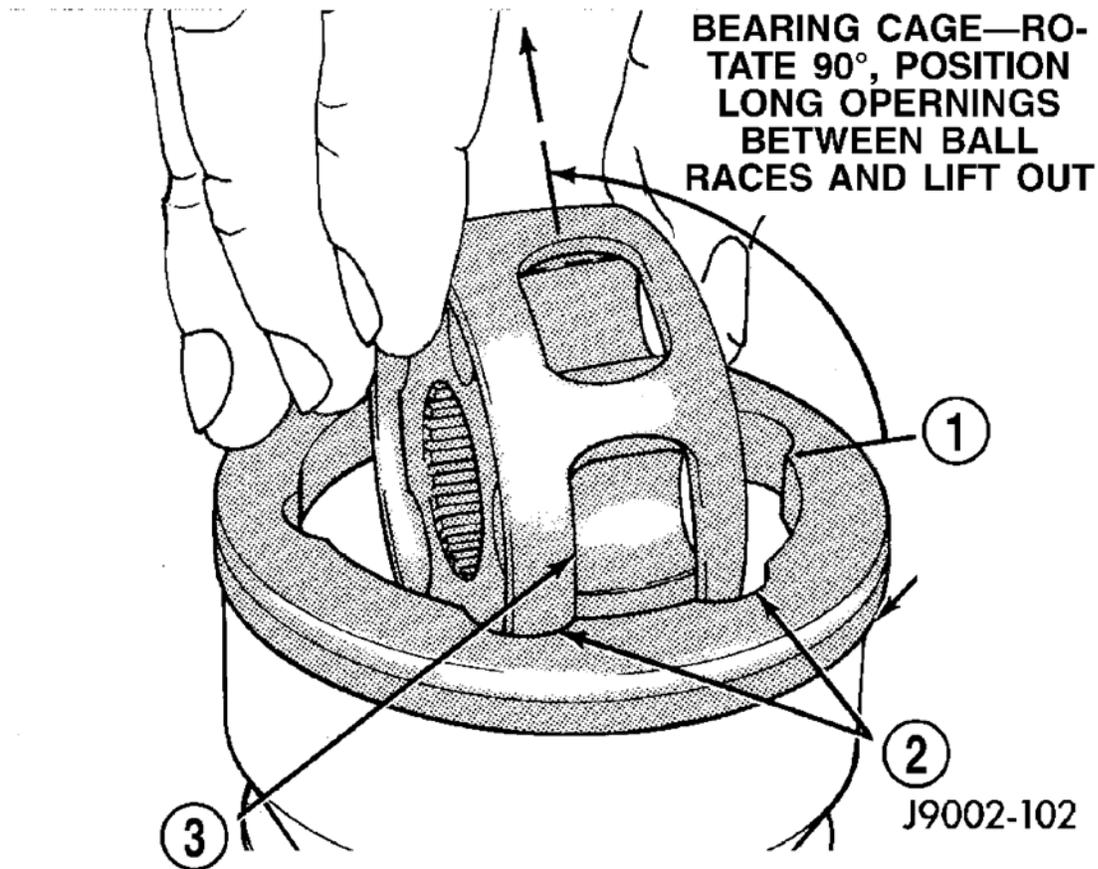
Lifting Cage/Inner Race Upward And Out From Housing
